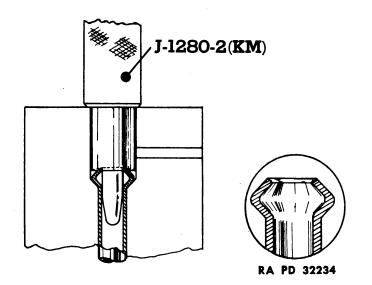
First Flare-forming Operation, Using Special Flaring Tool KM-J-1280 (41-T-3076-35)
